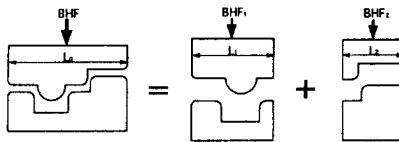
Partition of a circular-step bead into a single circular bead and a step bead.
